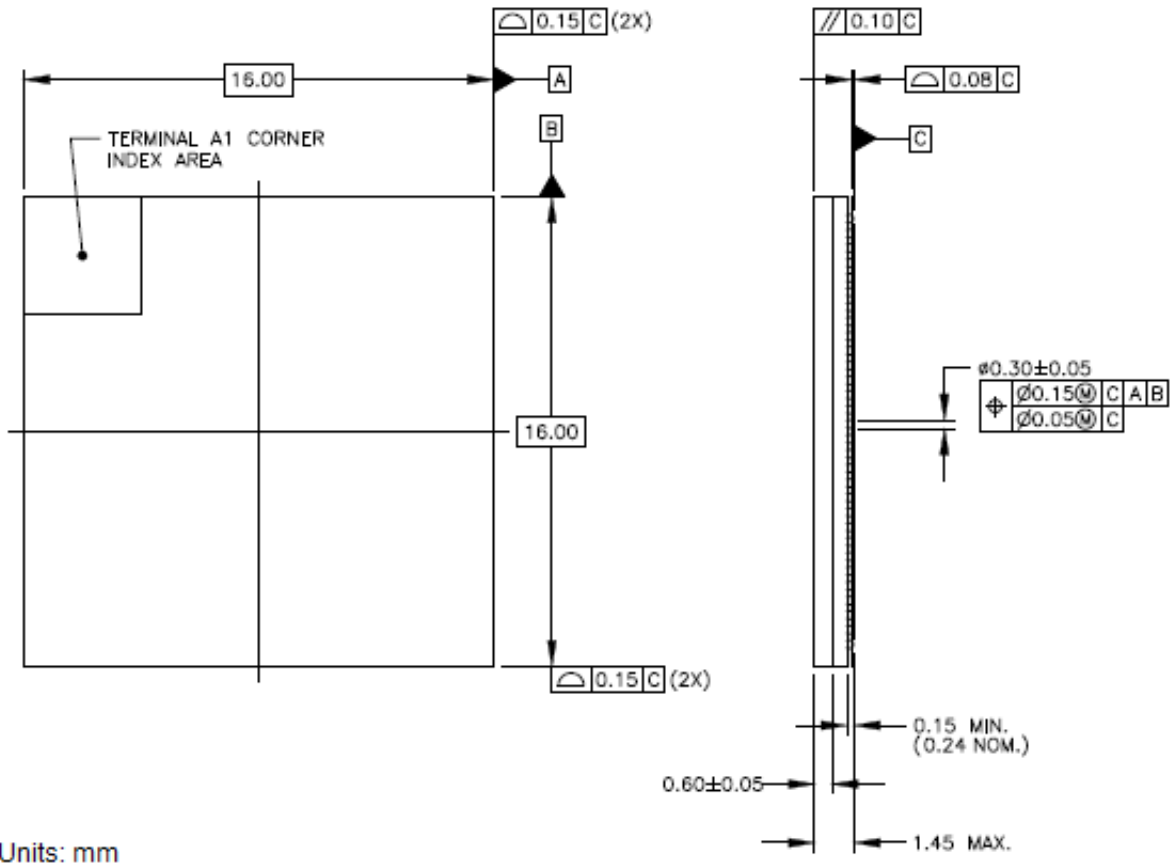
• MPF300T/MPF200T-FCSG536 Package Bottom-View
